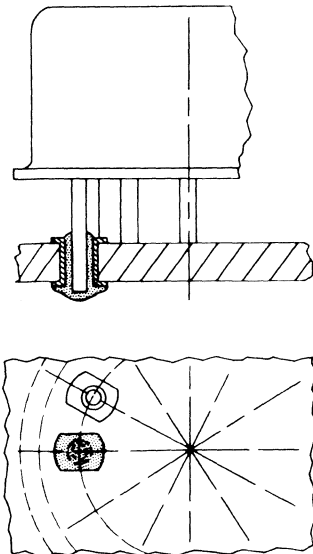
Straight-through mounting method for RCA TO-5-style packages.
